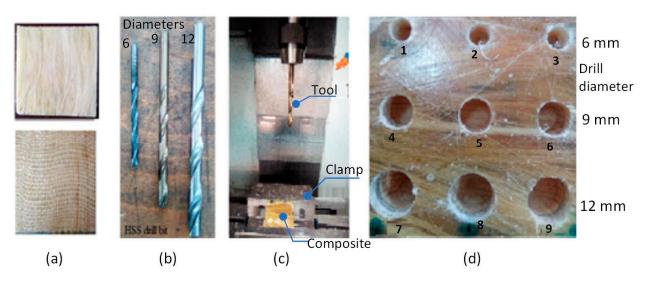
(a) Unidirectional (top) and woven (bottom) enset–sisal hybrid composite. (b) High-speed steel drill bit. (c) Drilling setup in CNC machine. (d) Drilled composite.
